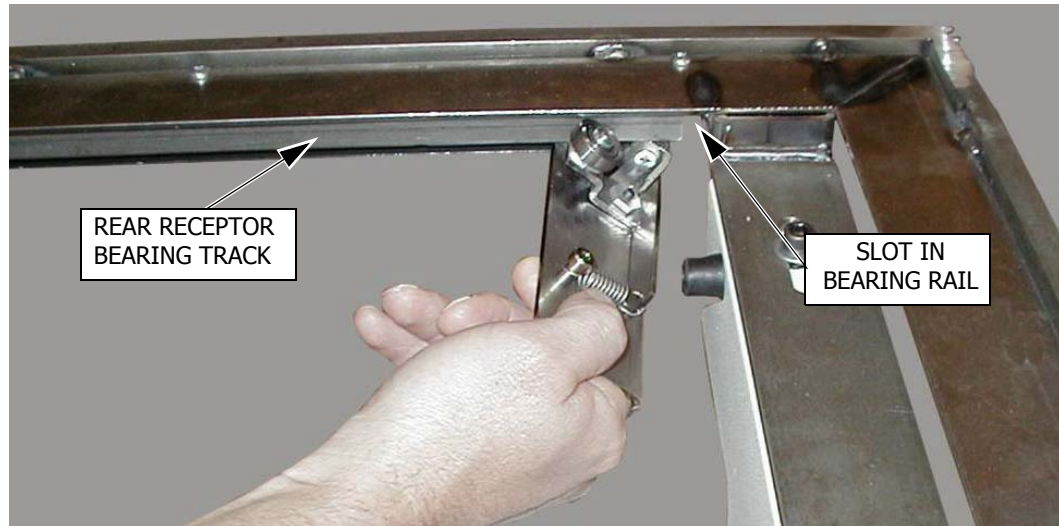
Inserting Left and Right Receptor Bearings onto Track
